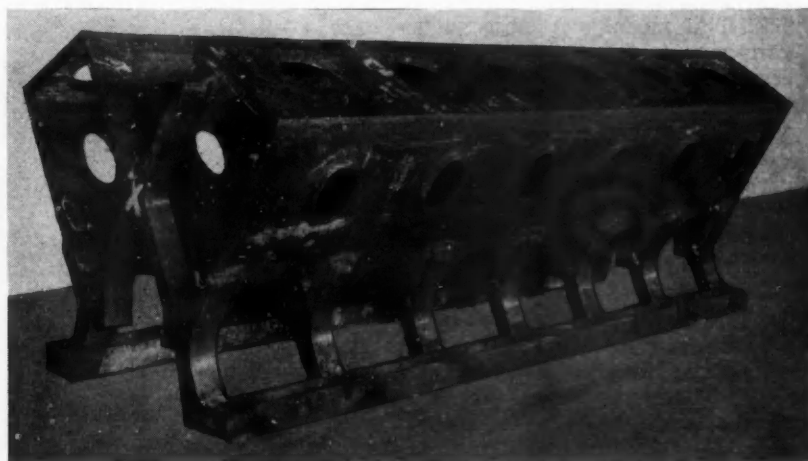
shows the engine block of a 500 hp. four-cycle marine engine with its welded bearing girders. These early blocks were of tie-rod construction, the welded steel serving as a stabilizing medium for the tie rods. It is a misconception that the tie rods take all the load. The rods, if they are screwed up and set properly by means of strain gages, bring into play the rigidity of the crankcase and it is just as important to prevent stress concentration in this case as in a structure in which all of the gas-pressure load is taken by a weld.
